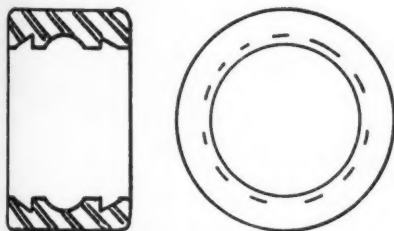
Drawing showing design of work-piece machined with equipment illustrated in Fig. 2.
